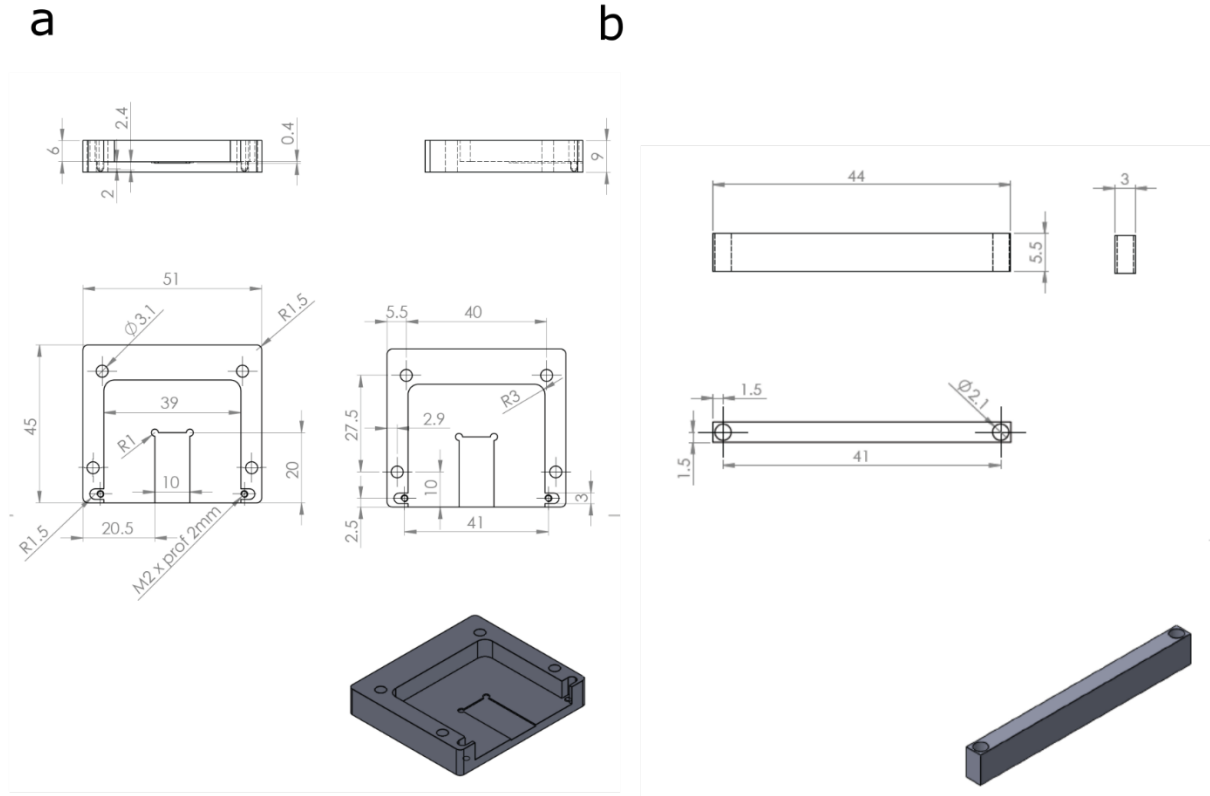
Chip Holder – mechanical design. The technical drawing conveys the main dimensions and tolerances necessary to reproduced the waveguide chip holder. a, The chip holder base can be directly screw in a standar matric breadboard with M2 screws. b, The holder gate ensure prevent scatter waveguide coupling light to create background inside the chamber.
